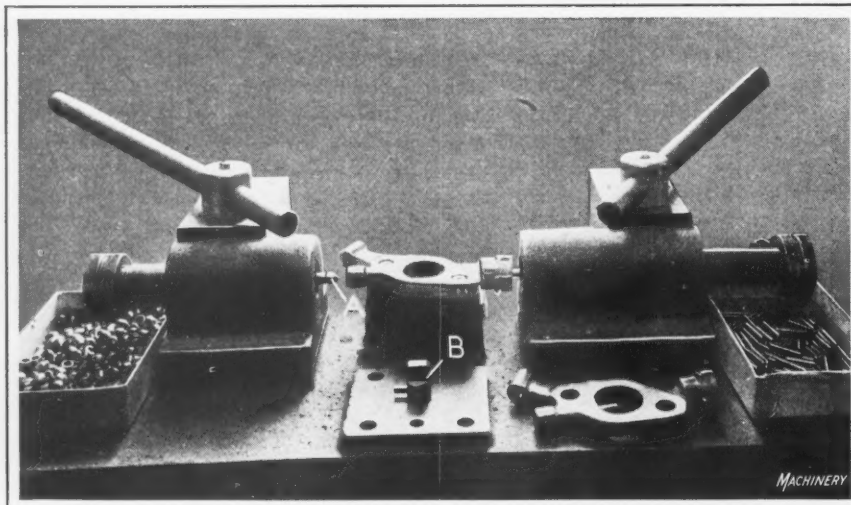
Assembling Fixture for seating the Jet and Mixture Tube
